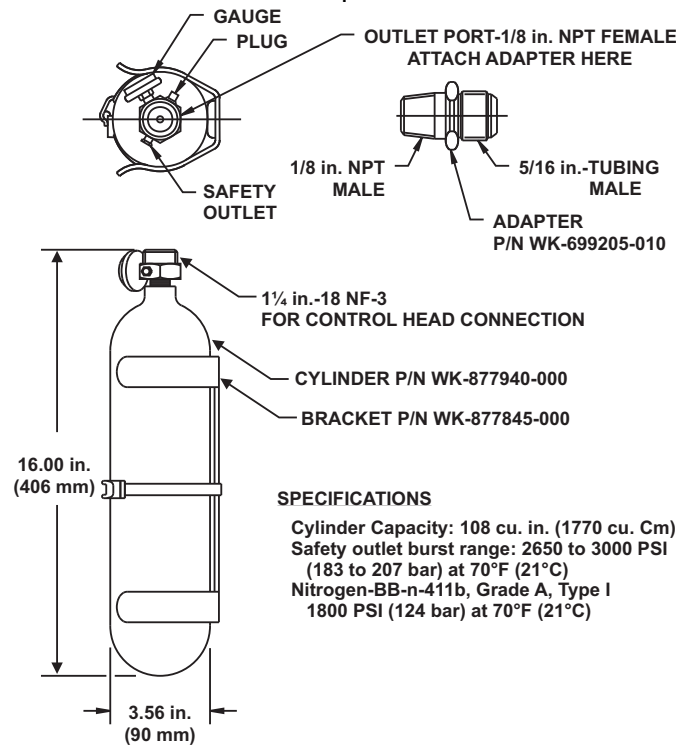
Nitrogen Actuator, Mounting Bracket and Adapter
